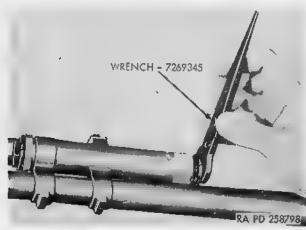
Removing gas cylinder nuts and extension w/wrench 7269345.
